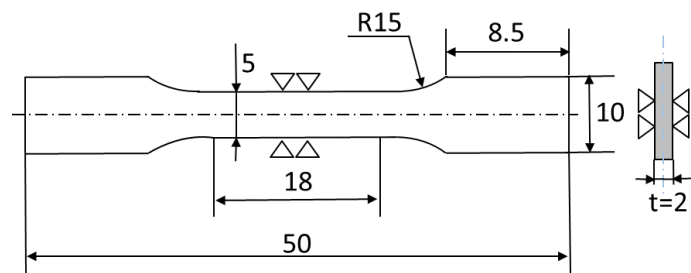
Shape and dimension of tensile specimens (Unit: mm).
